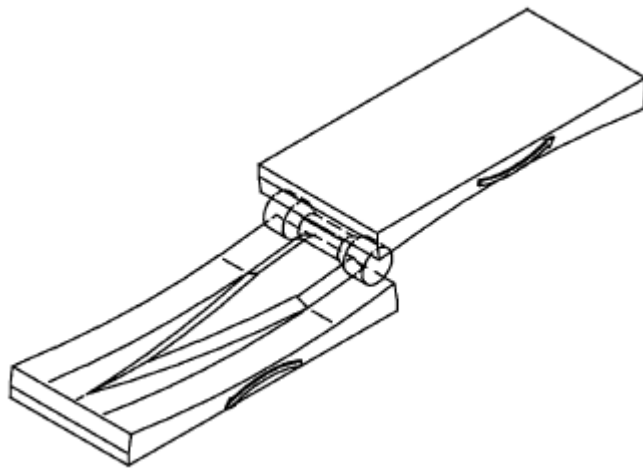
Concave Wedge Type Cross Wedge Rolling [25].
